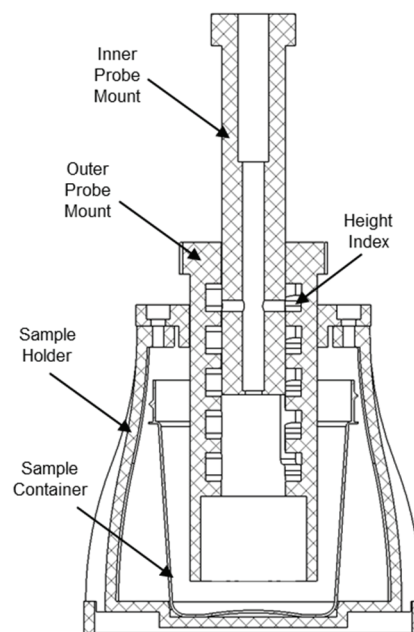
Cross-section view of the reflectance test fixture used to position the spectrometer probe above a soil or wheat stalk sample.
